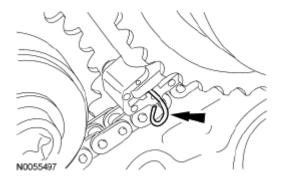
Locating Lockpin Courtesy of FORD MOTOR CO.
